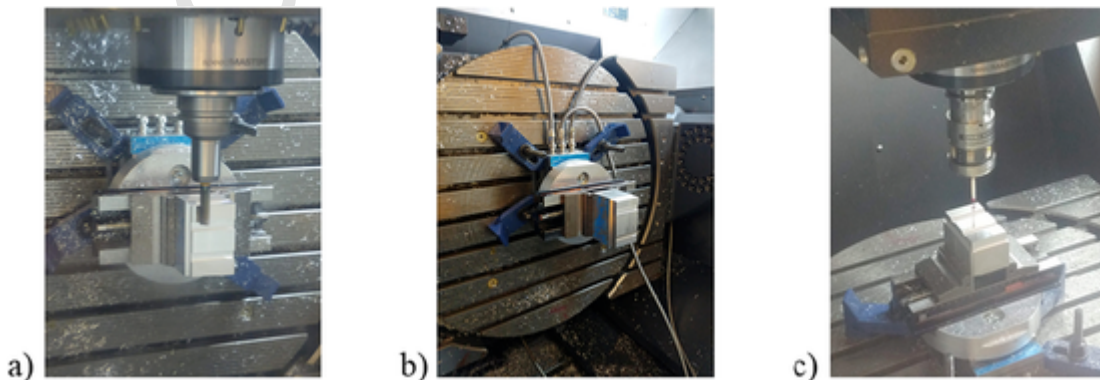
Experimental set-up: a) milling test b) force measurement c) surface acquisition.
